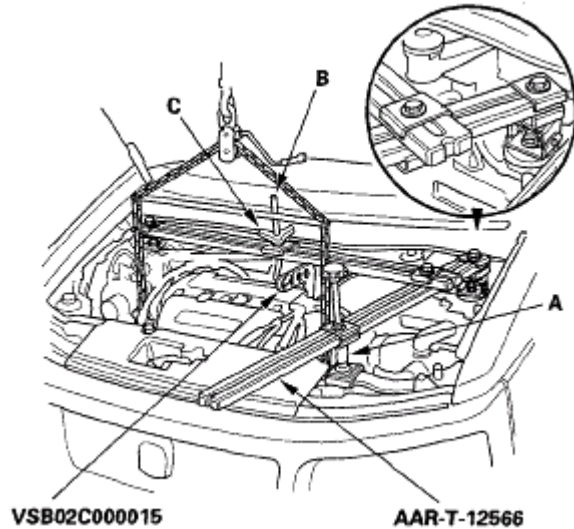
Identifying Front Leg Assembly, Hook, And Wing Nut
